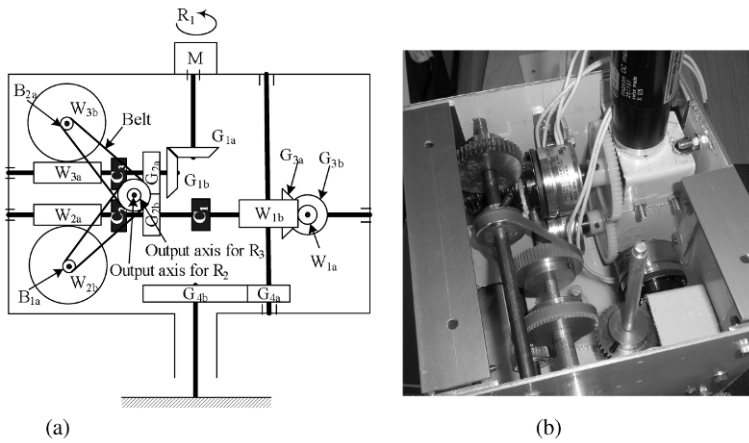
The clutch system in the arm shoulder: (a) scheme; (b) prototype.
